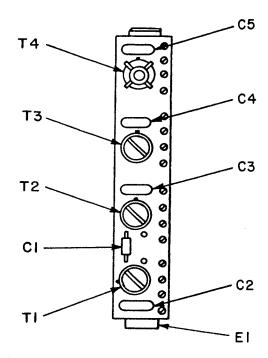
21 MHz Subassembly A2A4A11, Component Locations
